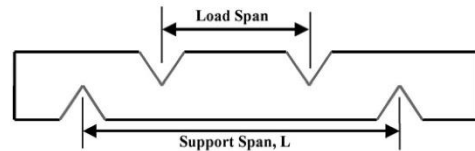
Fixture Used to Align Loading Noses and Supports
